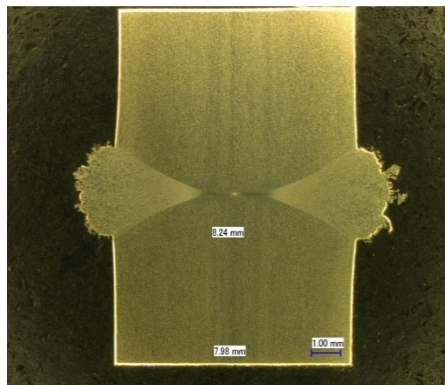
Macrograph of the welded specimen demonstrates excessive deformation at forging pressure of 5 bar (Exp. 8).
